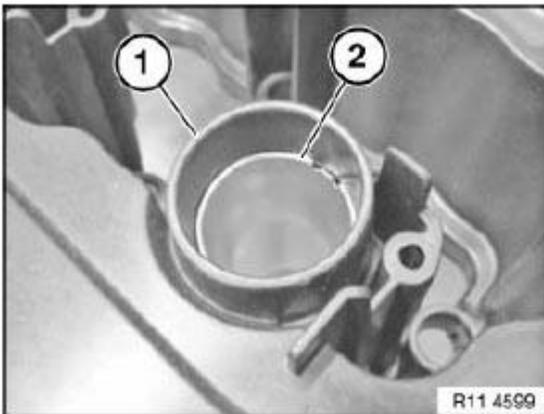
Identifying Cylinder Head Cover And Slotted Sleeves
